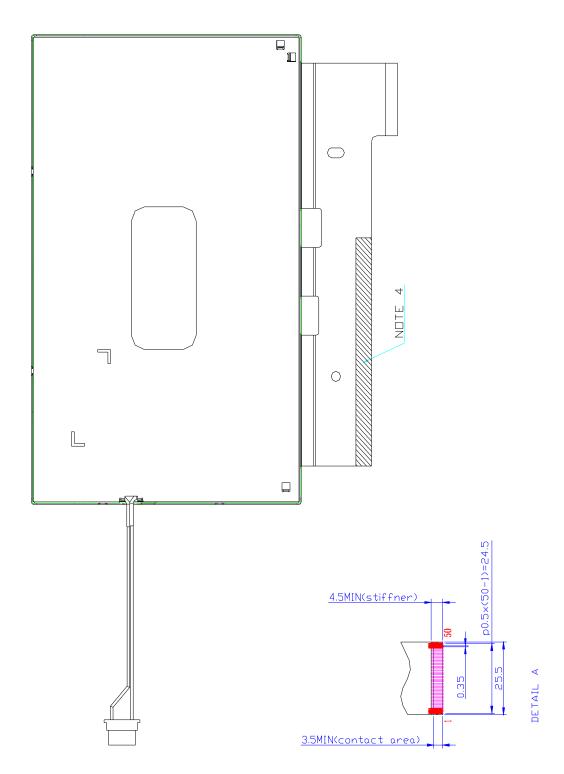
b Outline dimension of TFT-LCD module (Rear View)
